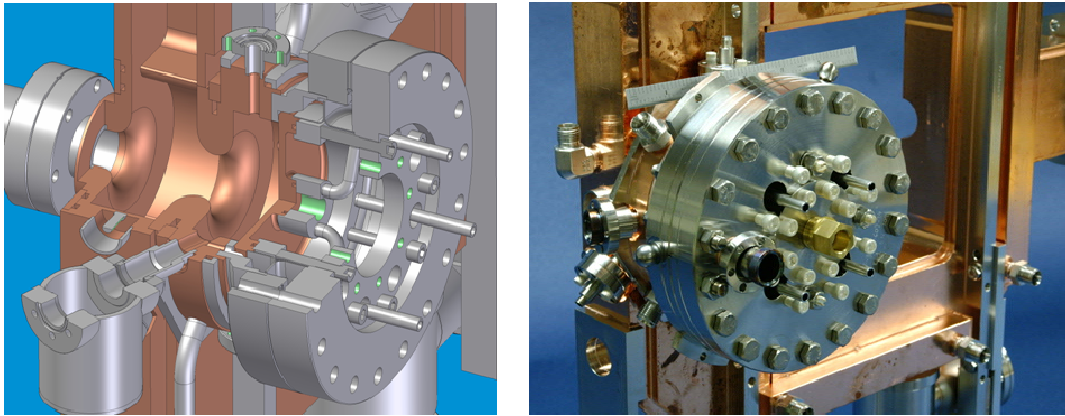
Left: Computer solid model cutaway to illustrate the interior of the gun and cathode assembly. Right: Photograph of the cathode mounted on the gun.
